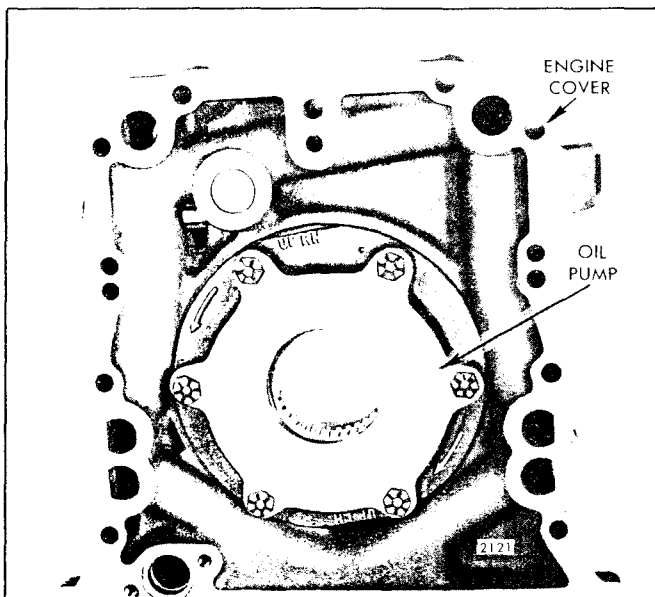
Typical Right-Hand Rotation Lubricating Oil Pump Mounting
